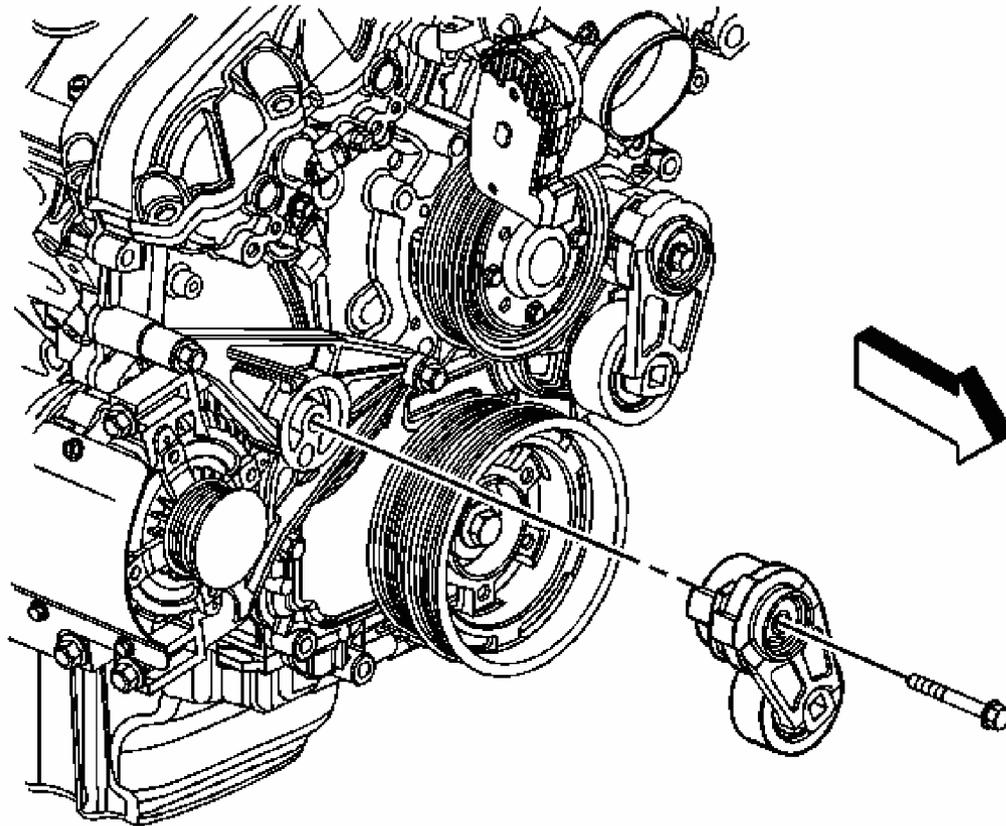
View Of Generator & Water Pump Drive Belt Tensioner
